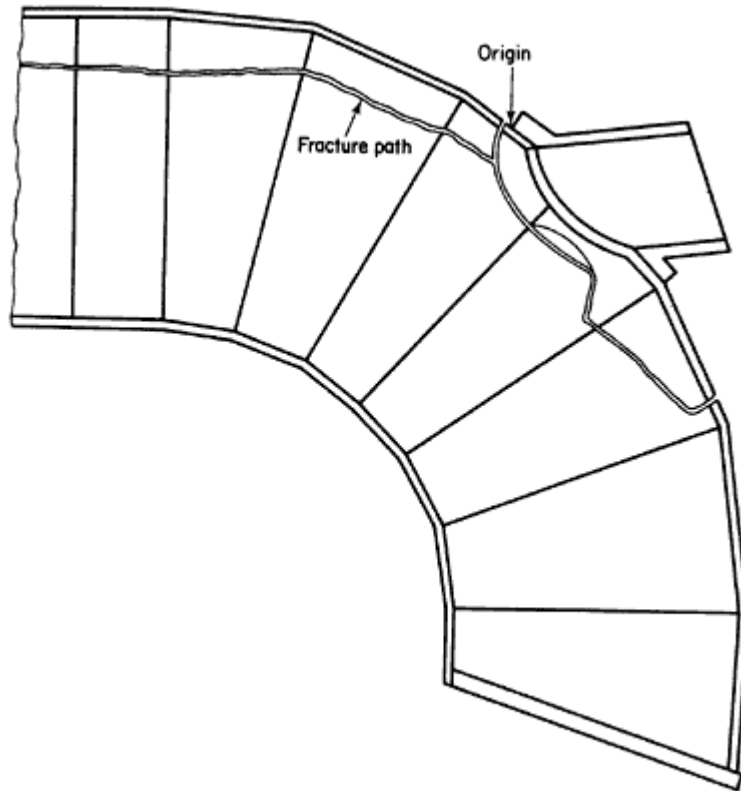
Sectional plan view of failure of water turbine spiral casing showing path of crack.
